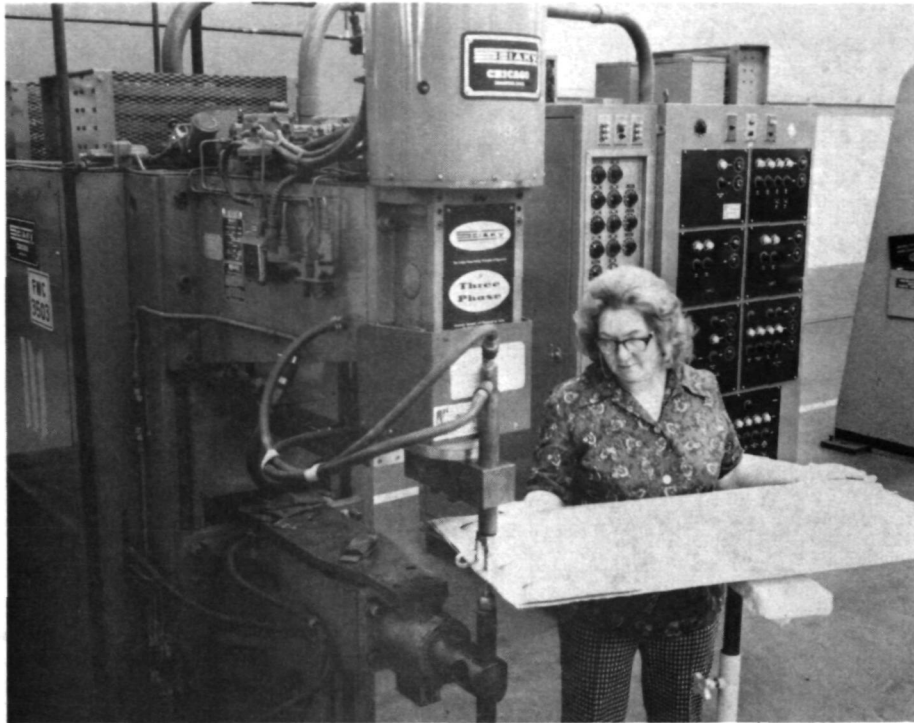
SPOT WELDING PANEL FINAL ASSEMBLY
